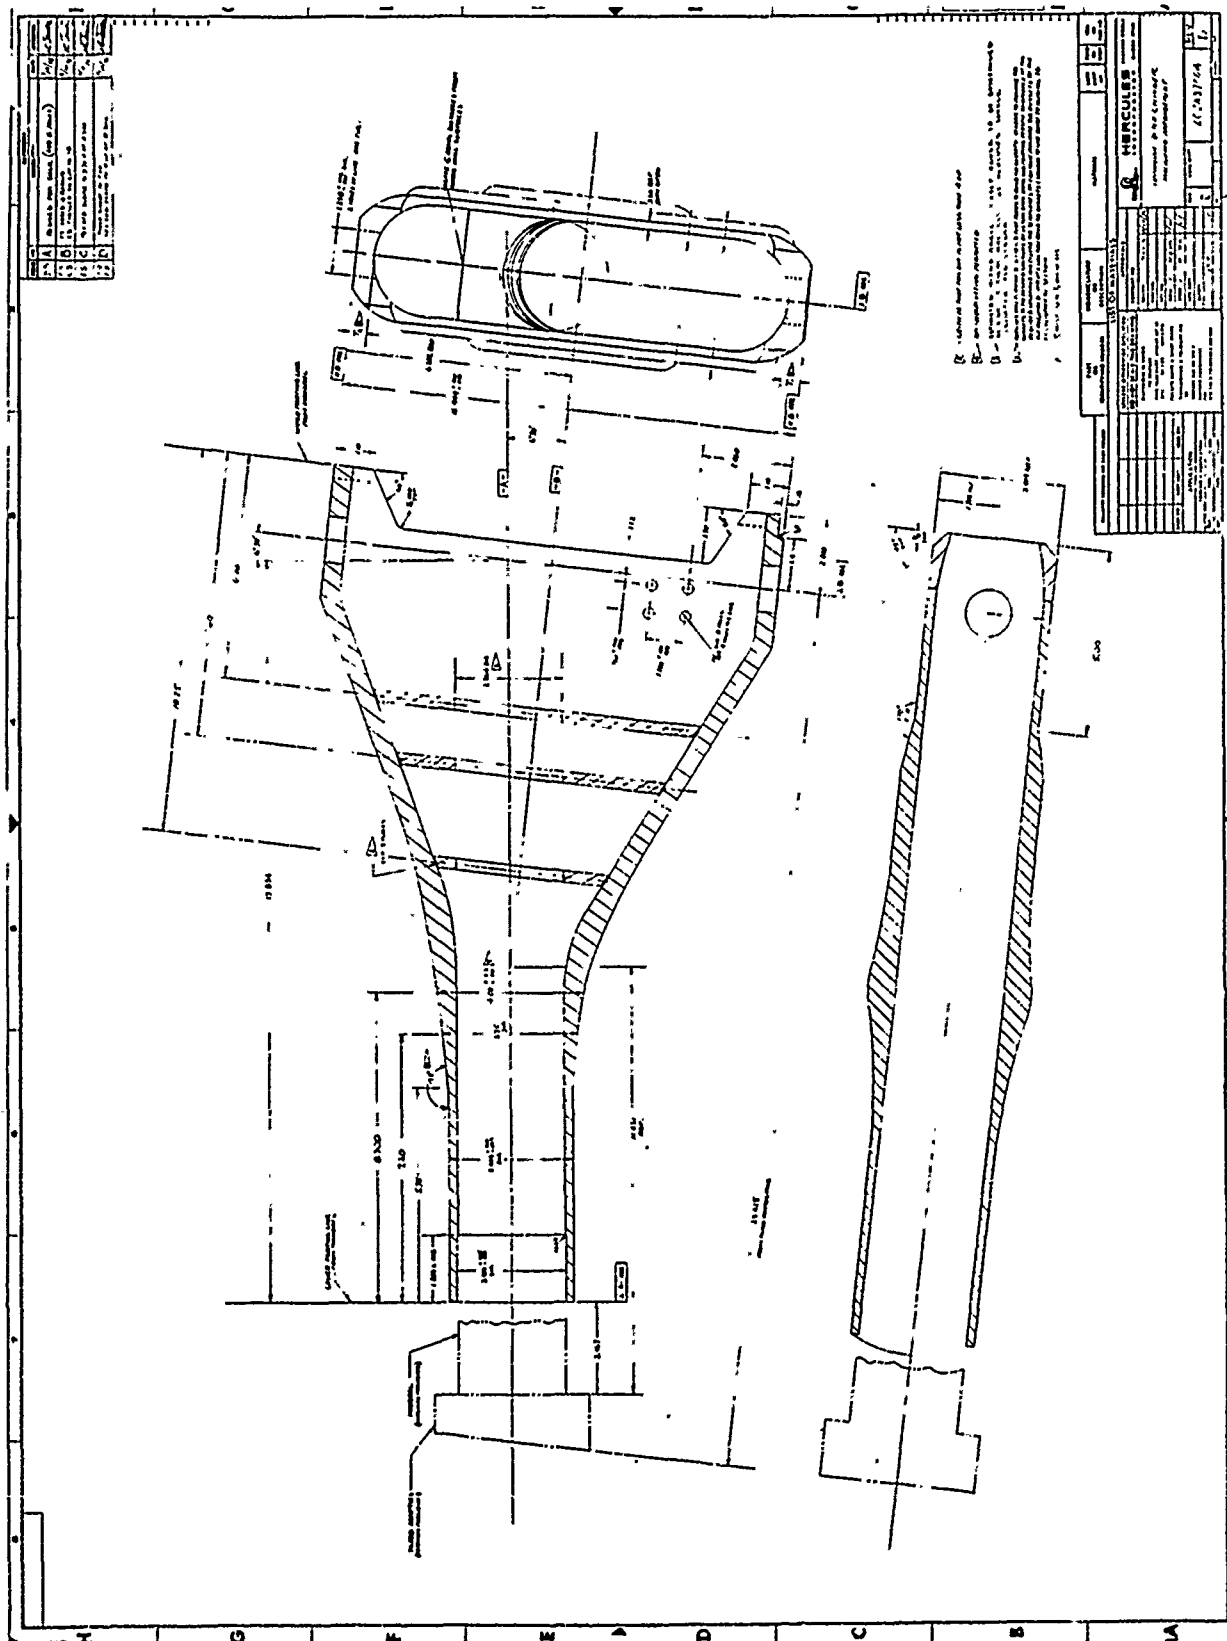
Third Design Machined Configuration (Drawing LCJA37004, Rev D)
